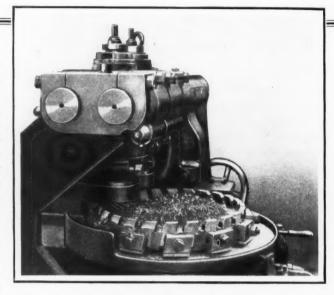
Point-milling High-speed Steel Cutter Blades on a Quantity Production Basis
